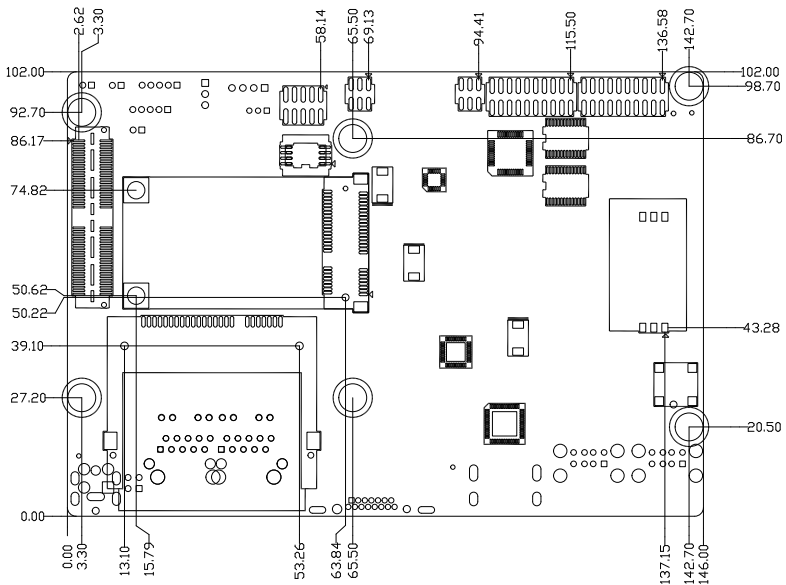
MIO-5250 Mechanical Drawing (Bottom Side)
